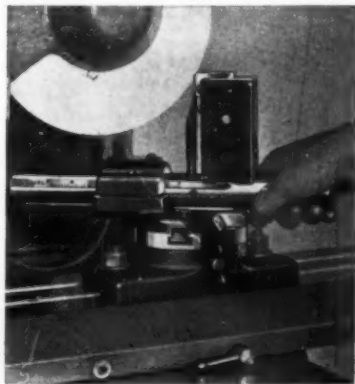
In these times, highly skilled hands must be reserved for complicated machining problems. Chasers may well be entrusted to a first-year apprentice if fitting grinding equipment is at hand. This set-up shows the grinding of chamfer angle on milled chaser, preceding Figure 7 adjustments.
